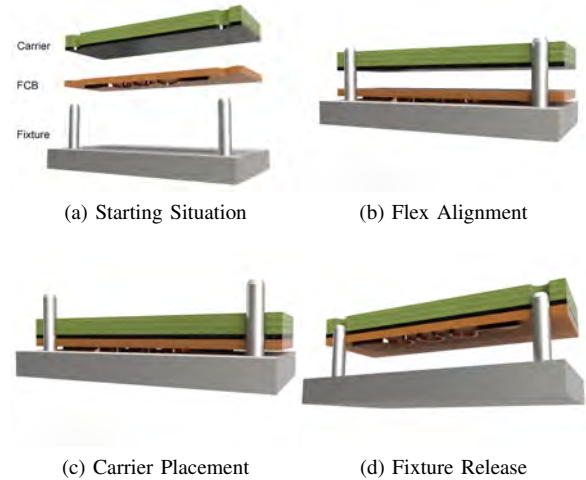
Alignment of a FCB on a carrier using a fixture: (a) Starting situation; (b) The FCB is placed on the pins with the top-side facing downwards; (c) The carrier board is placed on top with the adhesive side facing the FCB. (d) After applying firm pressure, both are removed from the fixture.
